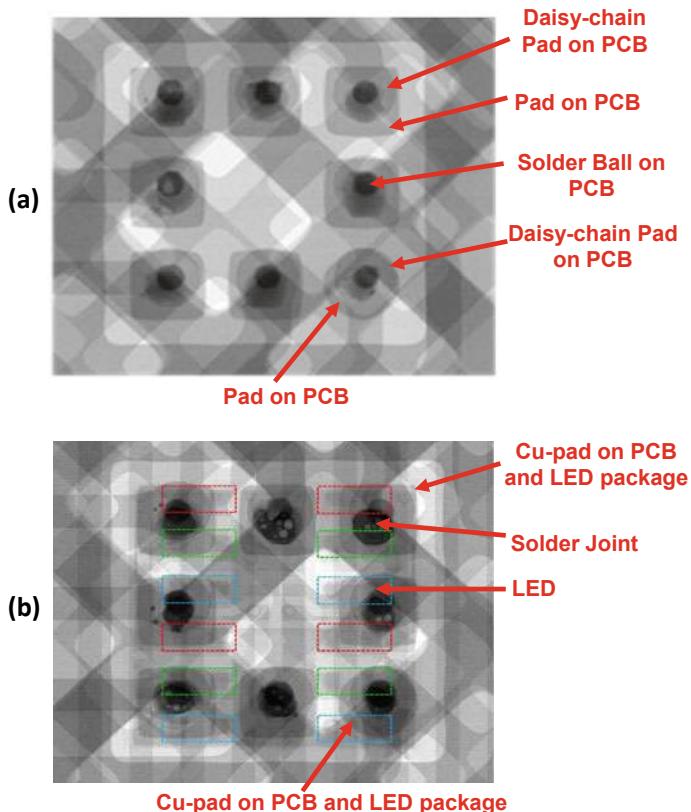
PCB layout for the drop test and thermal cycling test of mini-LEDs package
